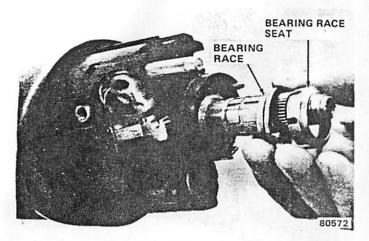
J-51 Upper Bearing Race and Seat Removal/Installation
